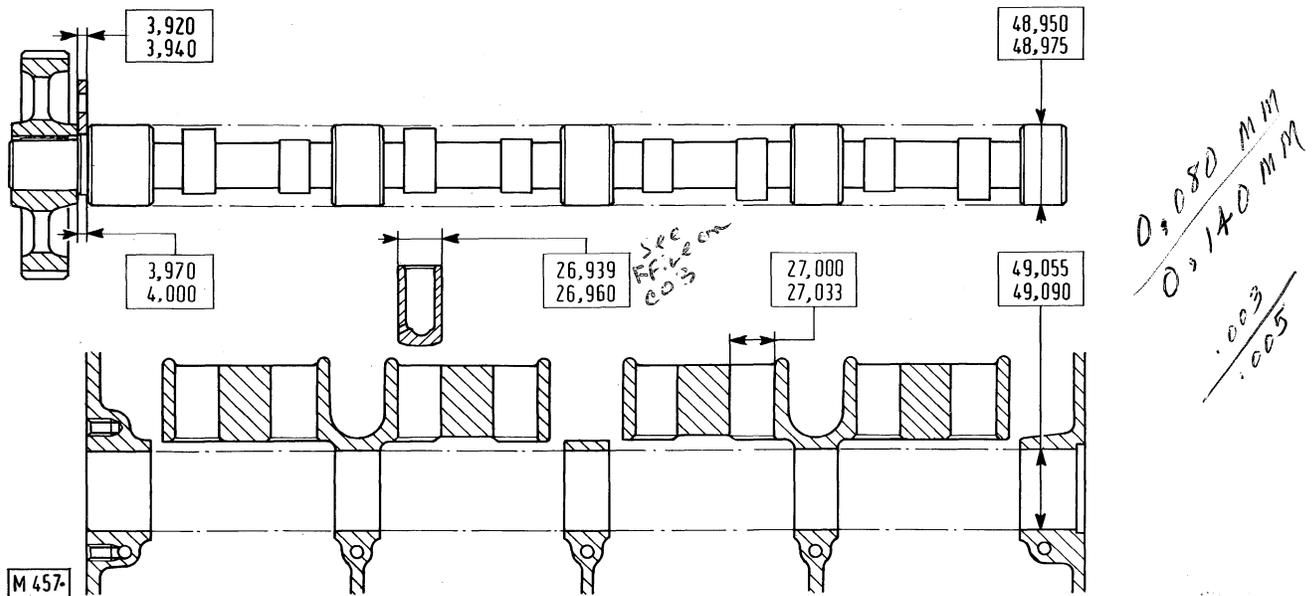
Camshaft, Thrust Plate and Tappet Details
